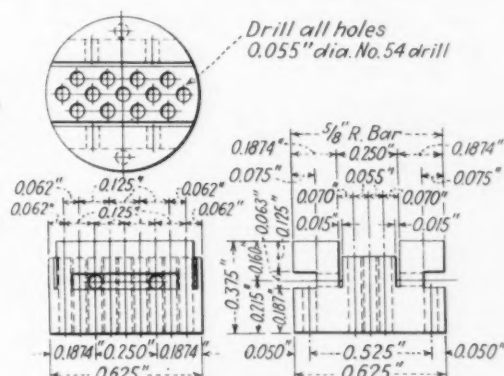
All dimensions for the manufacture of the tips are shown here.
